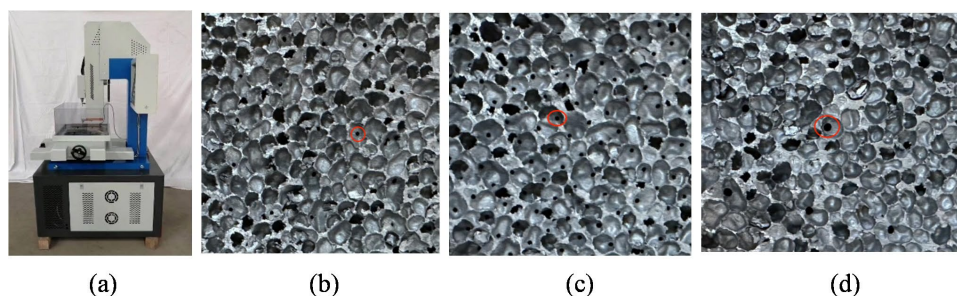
Actual images of high-speed EDM drilling equipment and closed-cell aluminum foam with different hole sizes: (a) EDM drilling; (b) 0.4 mm; (c) 1.0 mm; (d) 1.6 mm
